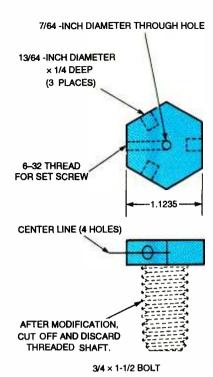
The rotor hub was fabricated from a ³/₄-inch × l¹/₂-inch bolt head. The bolt head was drilled (as shown in this diagram) and shaft of the bolt was cut off. The bolt head was retained as the rotor hub and the shaft was discarded.
